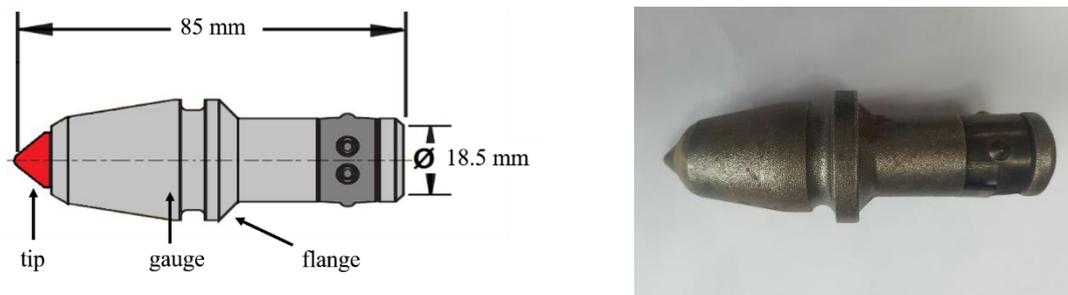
A photograph and schematic drawing of the conical pick used in this study
